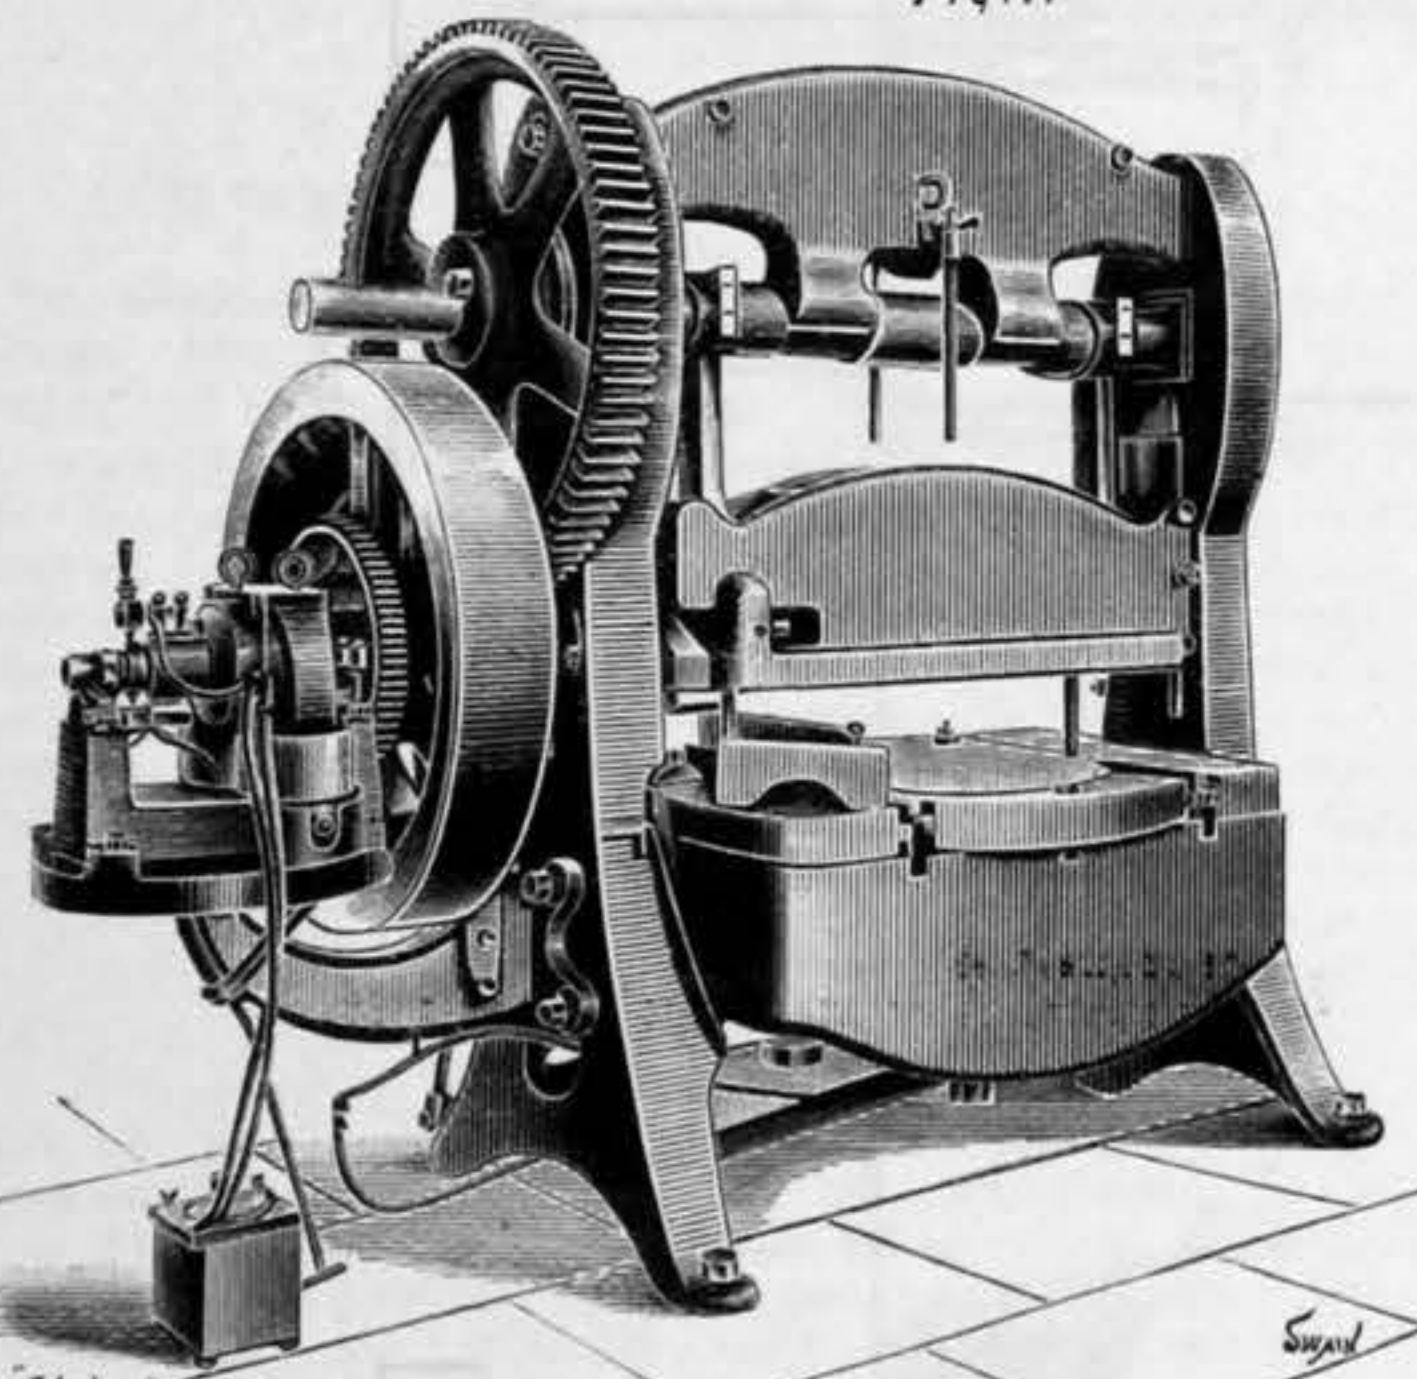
HEAVY PUNCH PRESS, WITH ELECTRIC MOTOR
